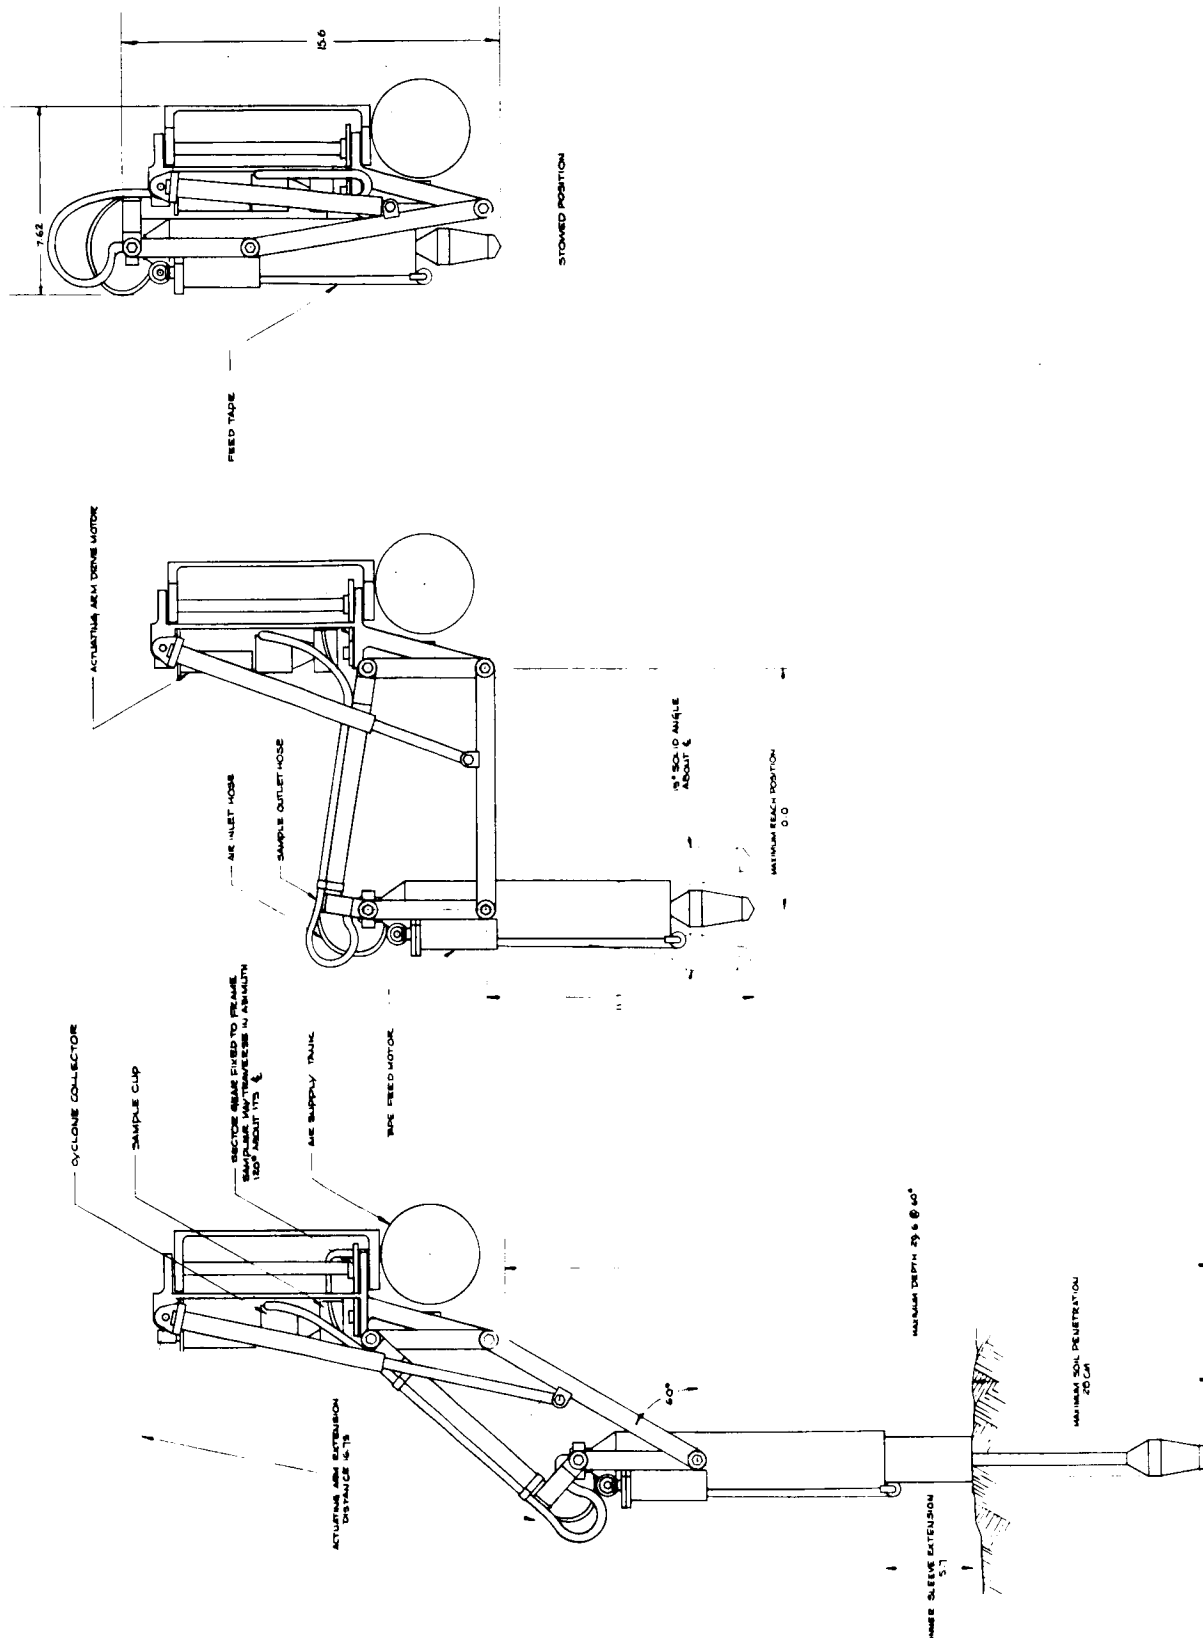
CONICAL ABRADING SIEVE CONE SAMPLER DEPLOYED
